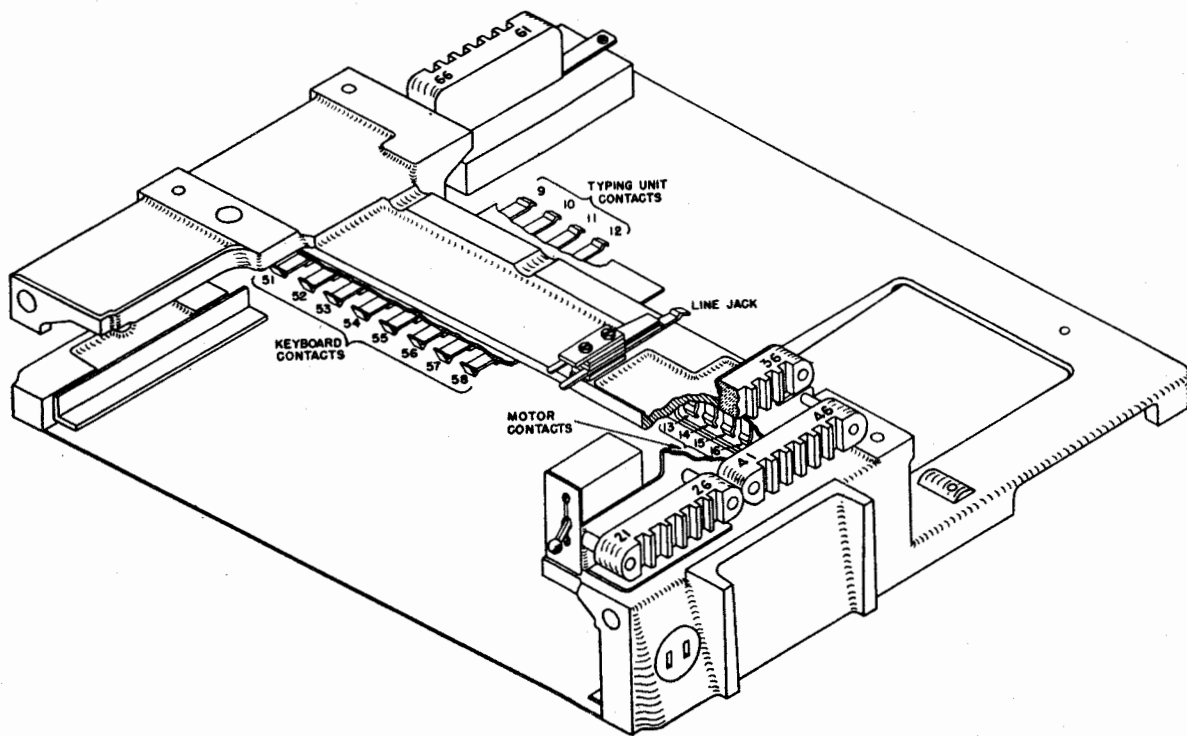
Terminal strip and base contact location, M-15 Teletypewriter.
